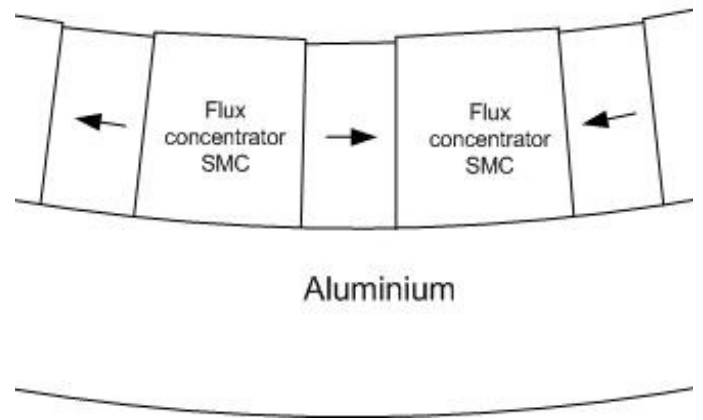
Detail of rotor layout before rotor machining. Each flux concentrator is made larger than the PMs in the radial direction.
